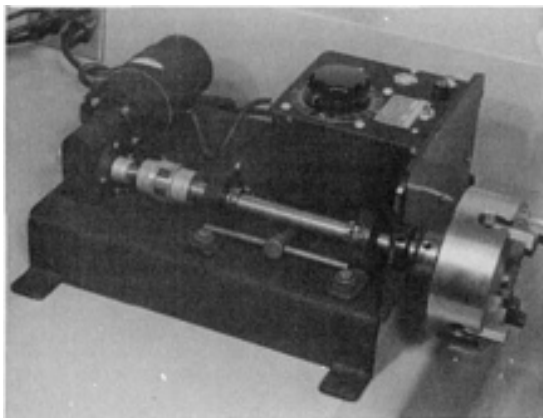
Turning head. Courtesy of SIFCO Selective Plating
